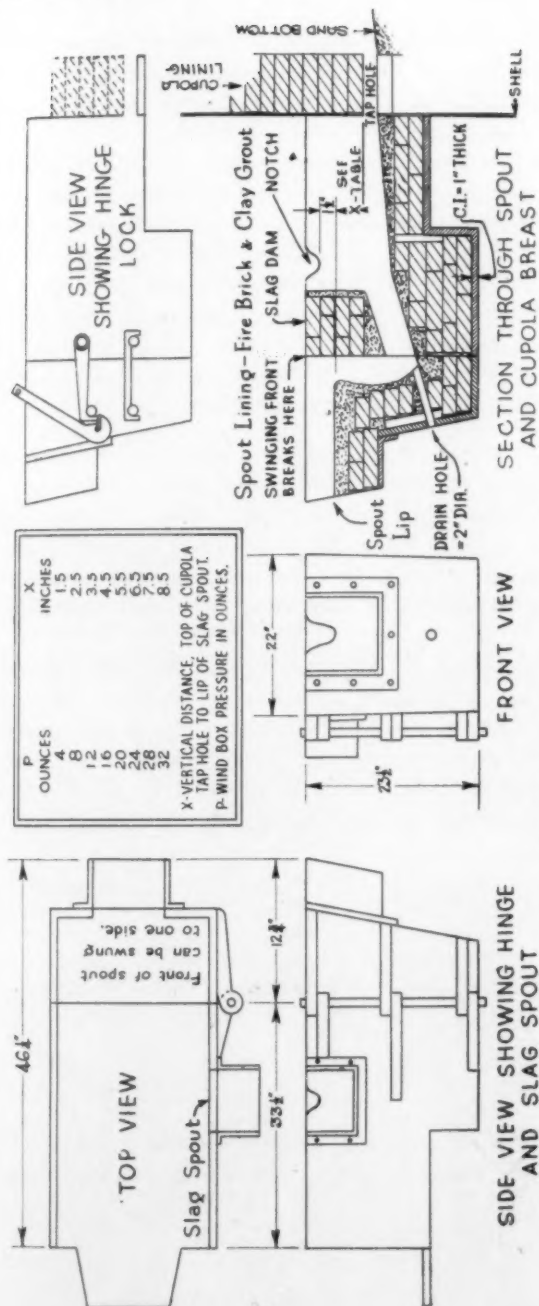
SECTION DRAWING OF FRONT SLAGGING CUPOLA SPOUT.
